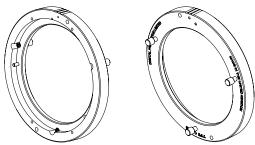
Adapter ring - clamp face (left) and datum face (right)
